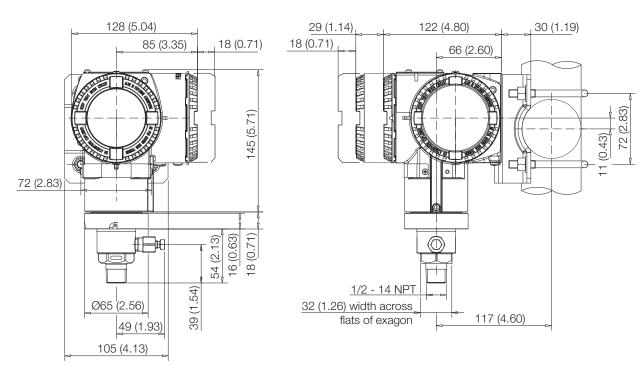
Model 266H or 266N Hi overload resistant P-Style transmitter with DIN housing installed on a 2"pipe with optional bracket (B2 Stainless Steel 316L)
